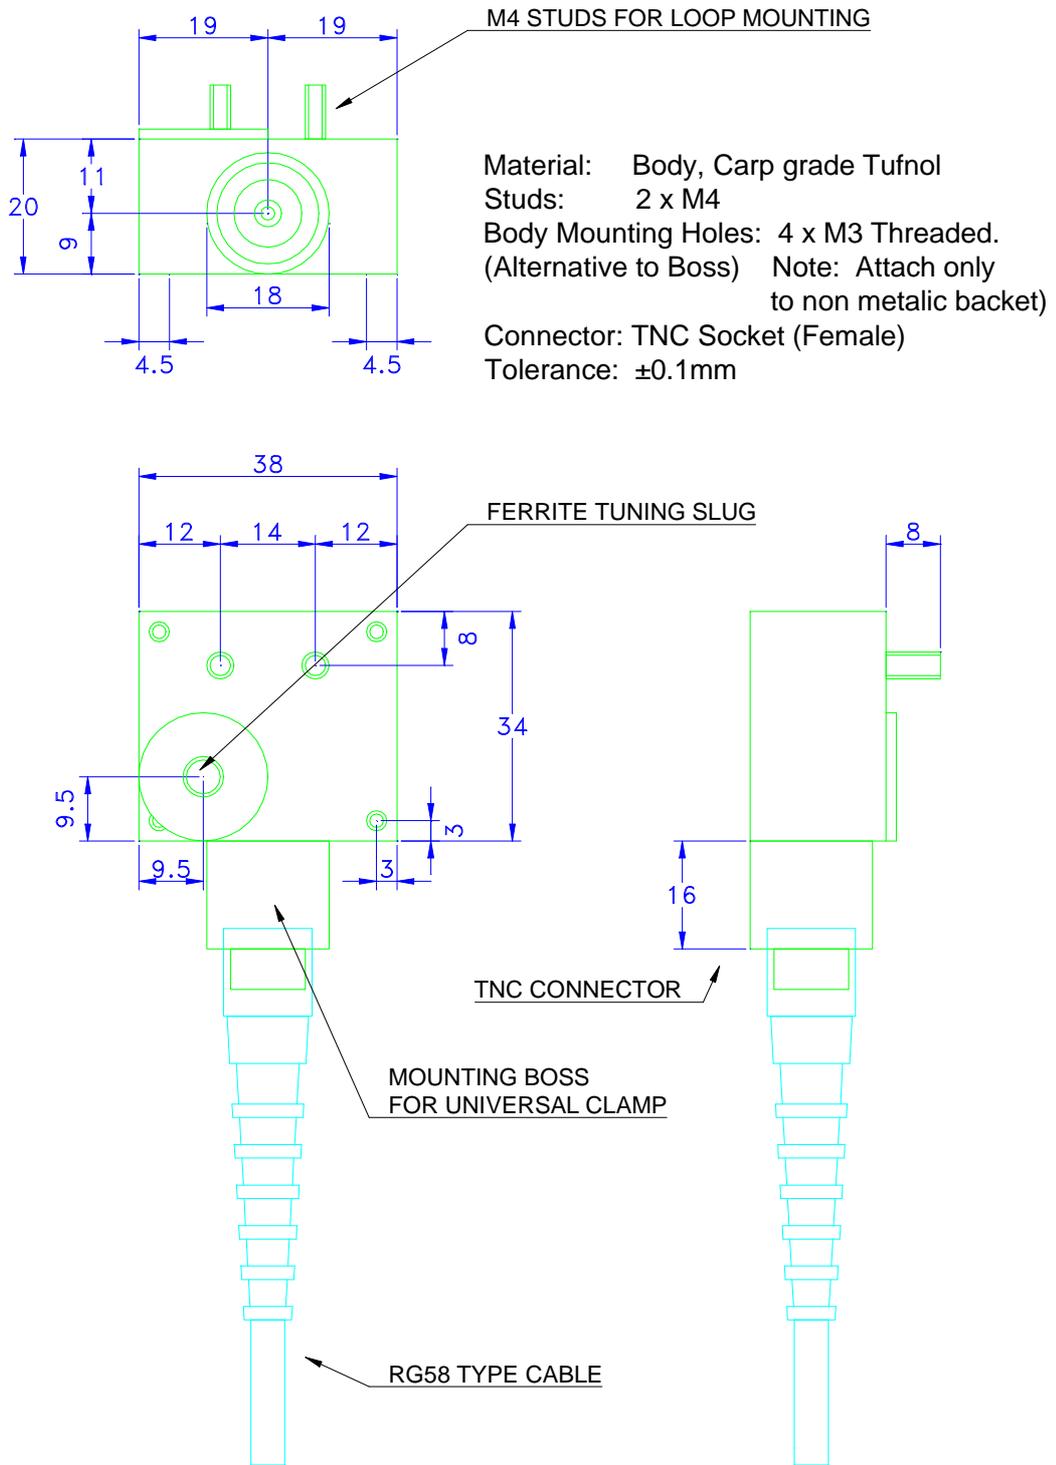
Dimensioned Drawing of Inductive Loop Interface Module IL2
